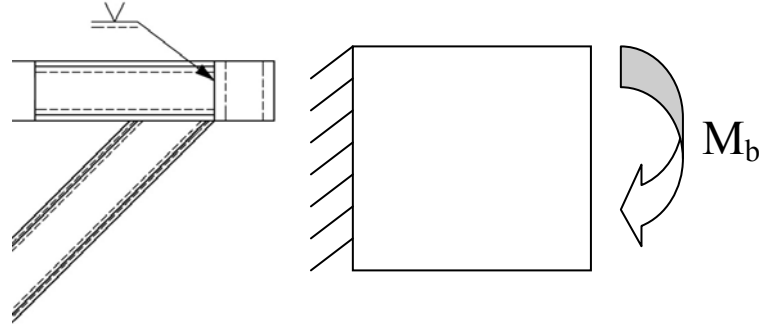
Diagram indicating the location of the weld and corresponding moment on the arm joint block
